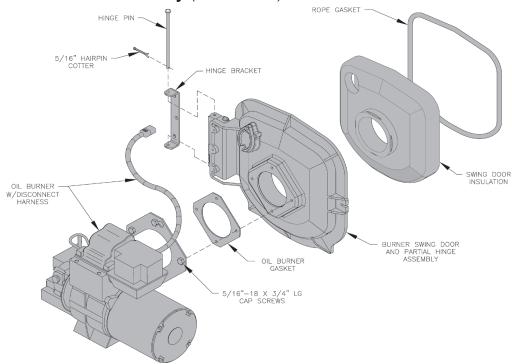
Oil Burner Installation (Beckett Burner Shown)
